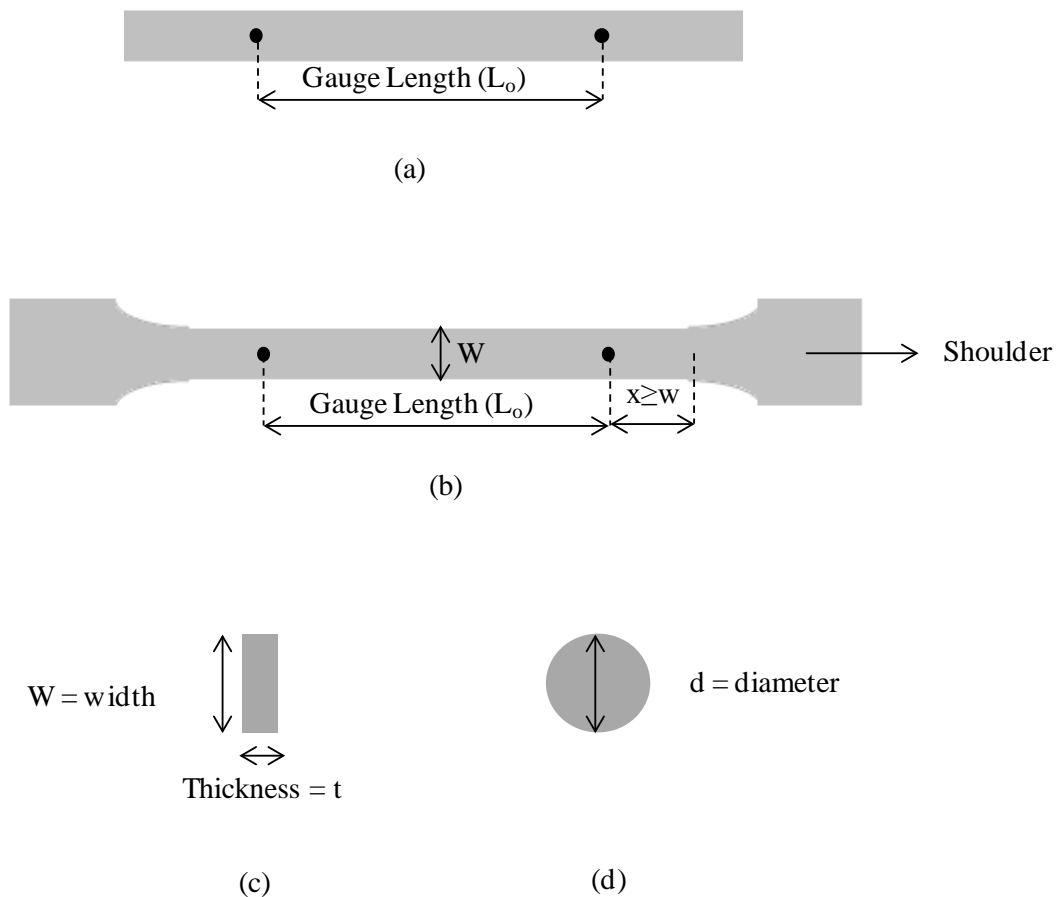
Typical tensile specimen (a) without shoulders (b) with shoulders (c) rectangular cross-section (d) circular cross-section
